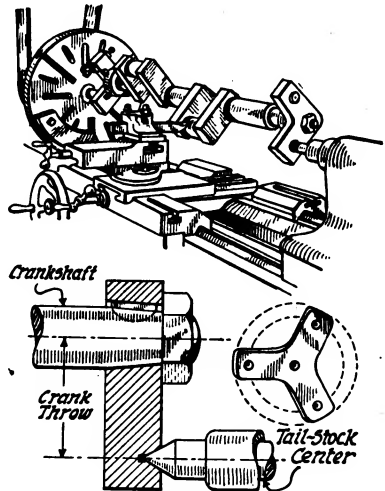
Fixture and Lathe Jig for Turning Six-Cylinder Crankshafts
